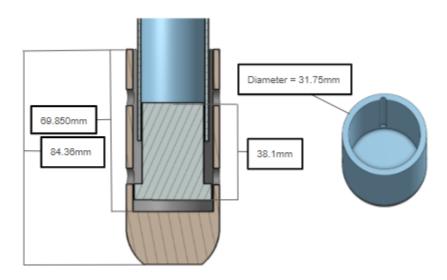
End-Cap 2.0 CAD drawing with dimensions.
